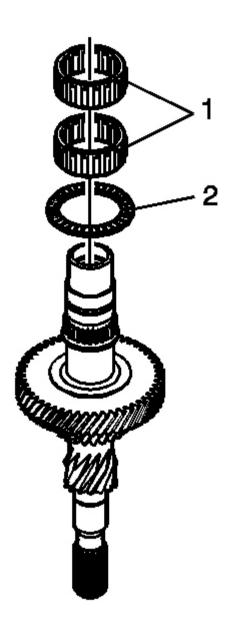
Caged Needle Bearing & Thrust Bearing Courtesy of GENERAL MOTORS CORP.
